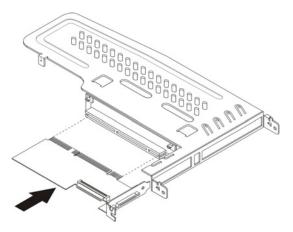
Installing the SCSI controller board in the low-profile expansion slot
